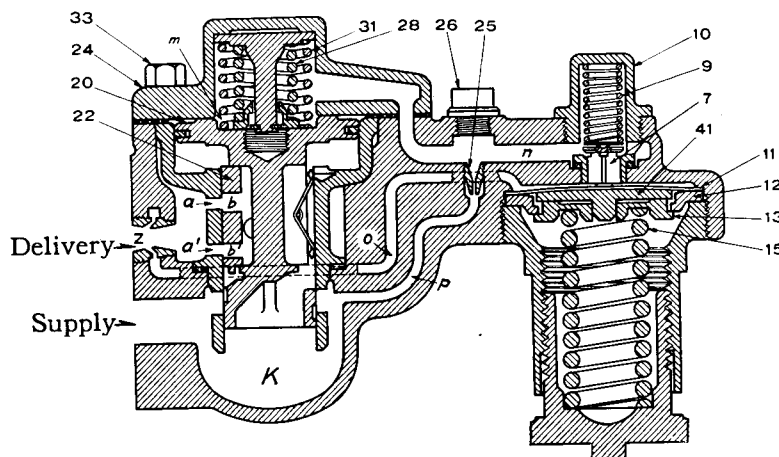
TYPE M-3 FEED VALVE—DIAGRAMMATIC VIEW SHOWING OPEN POSITION
